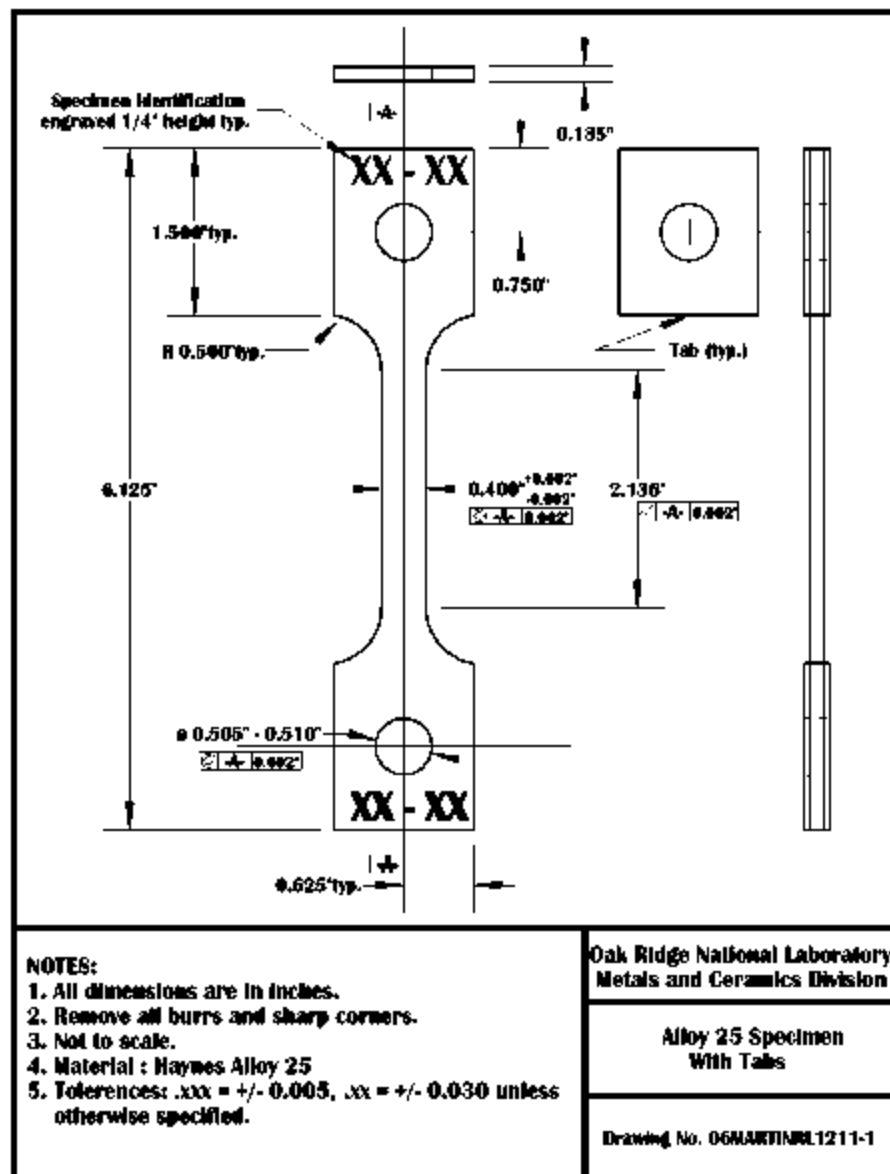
Specimen drawing for alloy 25 plate creep and tensile specimens.
